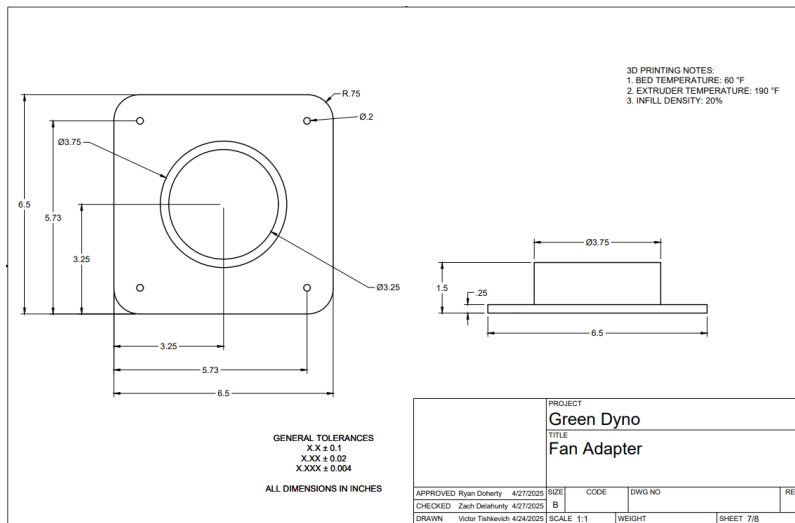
Exhaust Duct Fan Adapter Manufacturing Drawing
